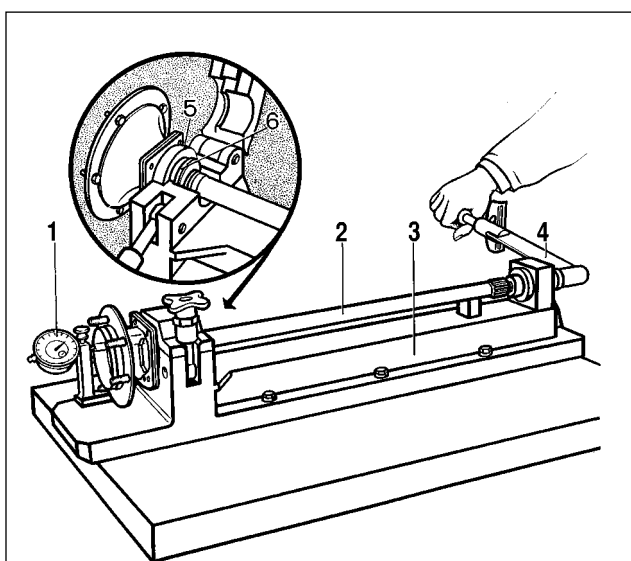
Checking the force of pressing out the axle shaft bearing stop ring:
